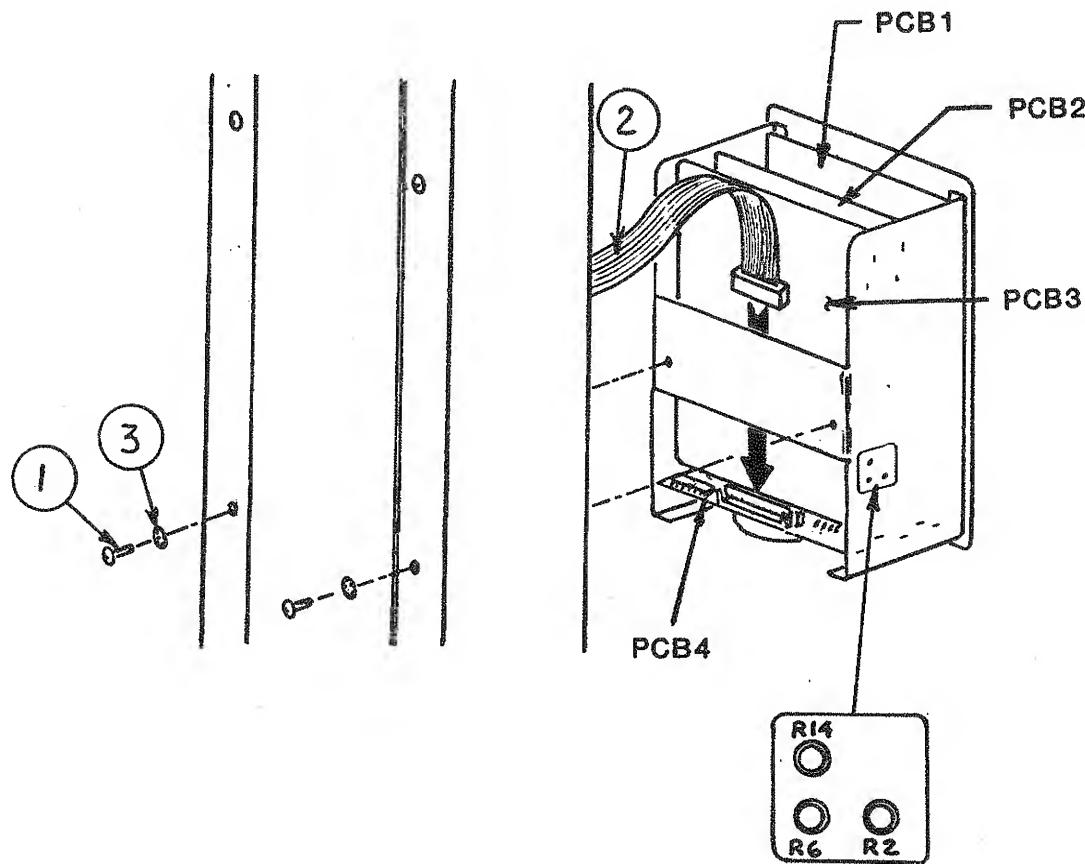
CONTROLLER MODULE REMOVAL AND REPLACEMENT, AND ADJUSTMENT AND CONNECTION POINTS.
